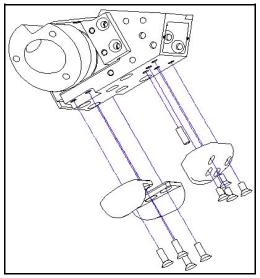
Pelvis Coccyx, D-Points/ Base Module exploded assembly
